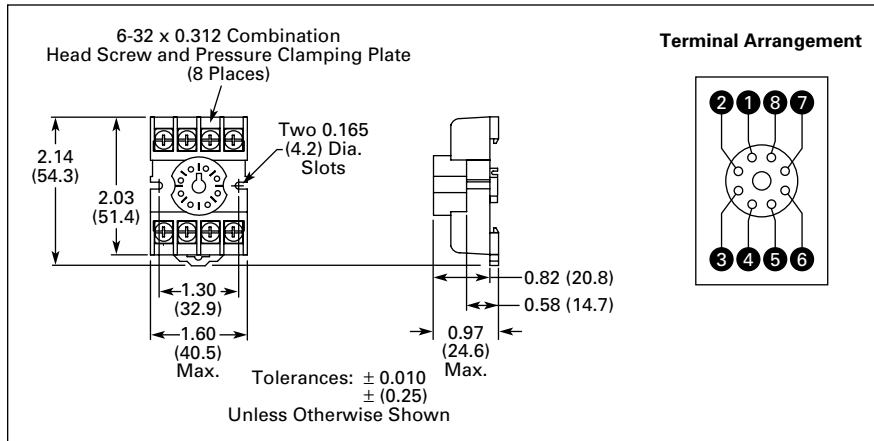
D3PA2 — Approximate Dimensions in Inches (mm)
